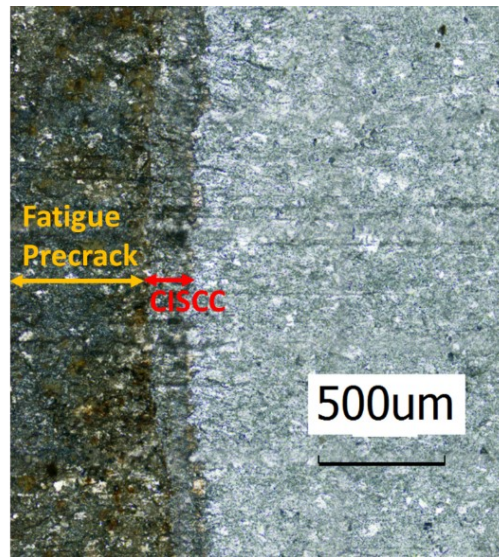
Typical fracture surface under CISCC from specimen C1
